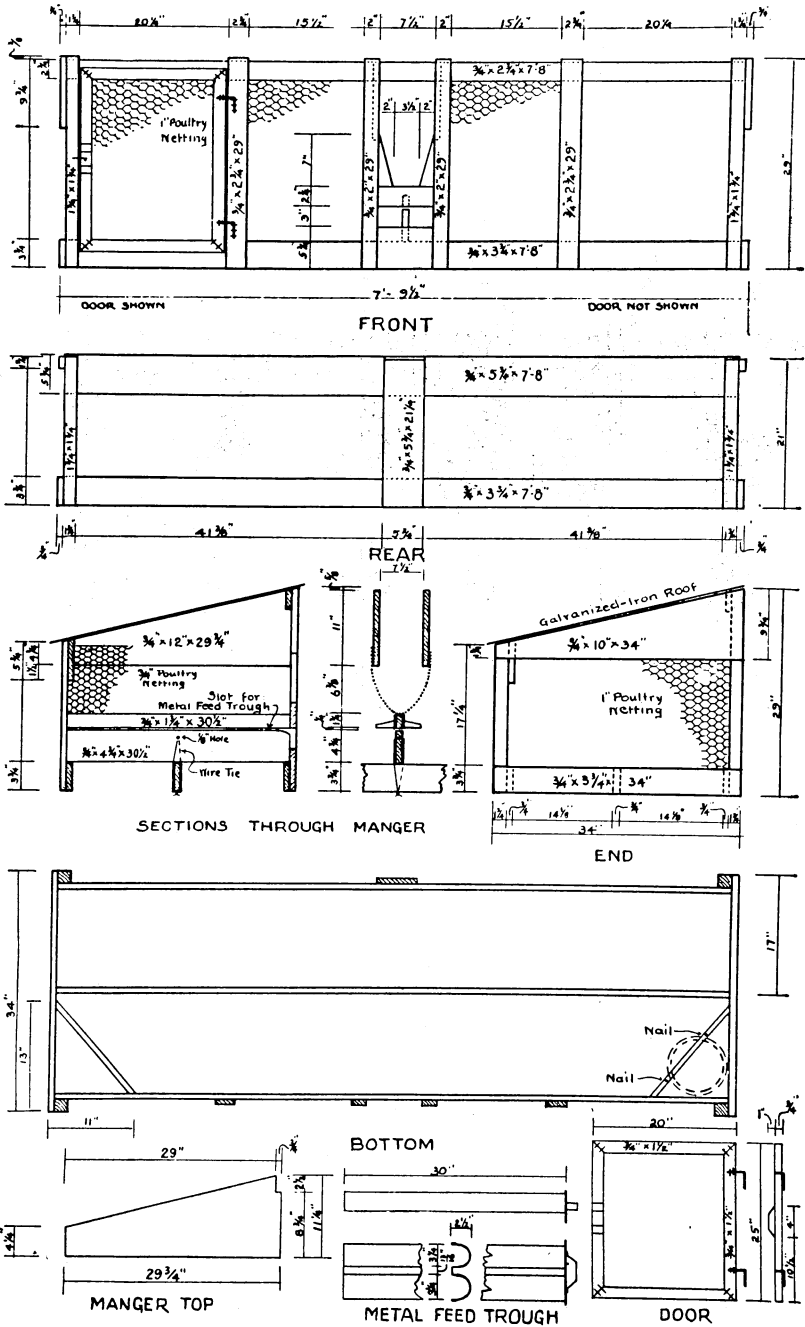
Construction details for a two-unit wooden-frame wire hutch.
